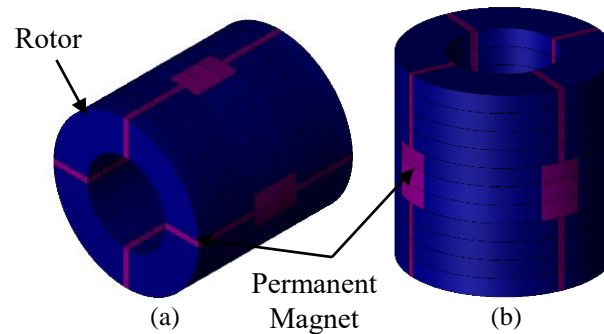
Rotor pole axial pairing rotor design a) Isometric view b) Top view
